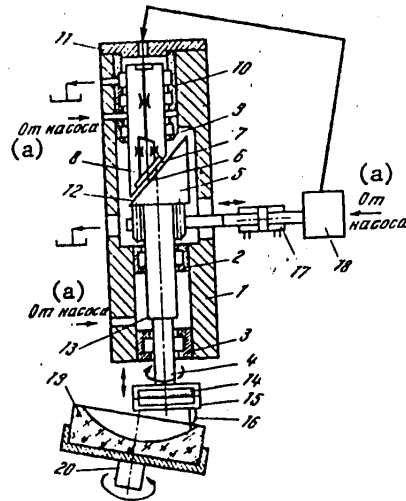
Diagram of a machine tool with cylindrical hinge.
